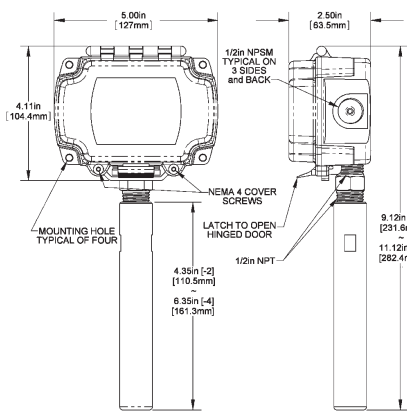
2" & 4" Thermobuffer in a BAPI-Box (BB) Enclosure
